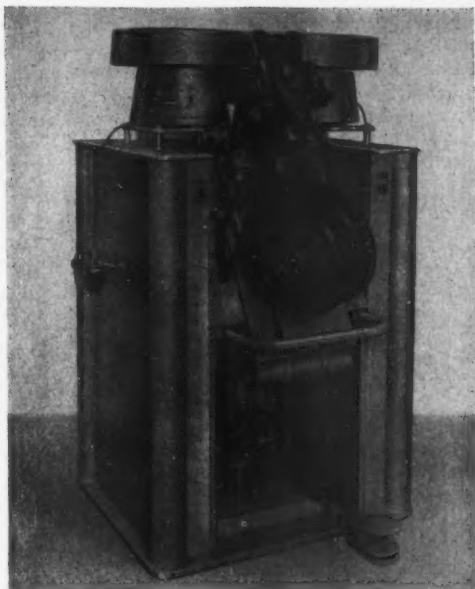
General view of the Hymatic valve inserting machine showing a wheel in the loading position
